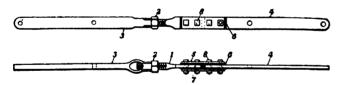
Insulated Rod with Special Jaw for Rocker Shaft Connection. The Union Switch & Signal Company.
